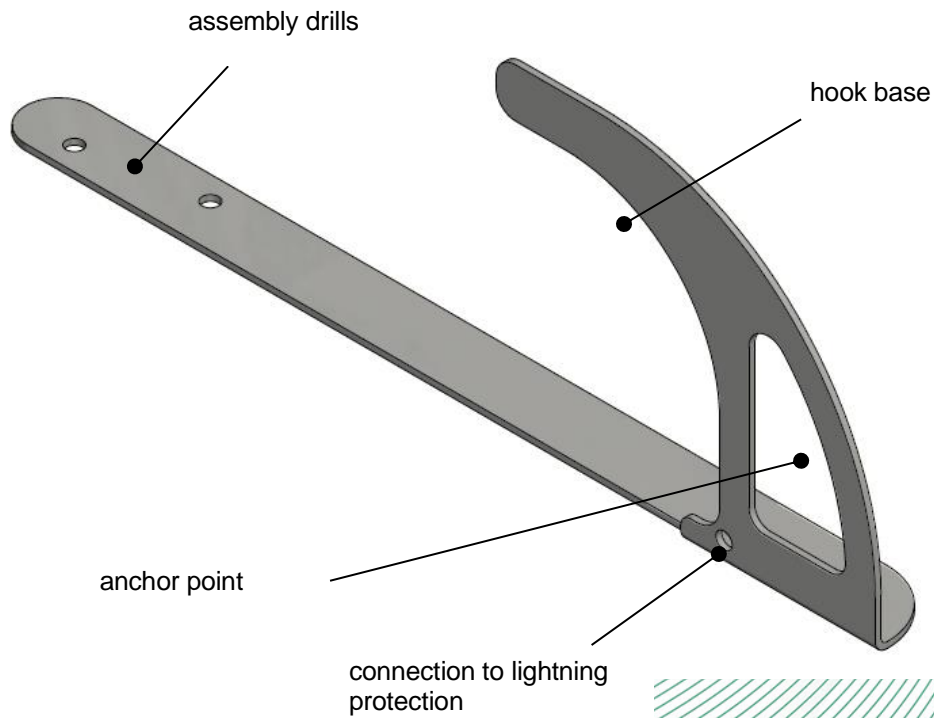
Safety roof hook type B, type ABS-Lock® DH-04-F
